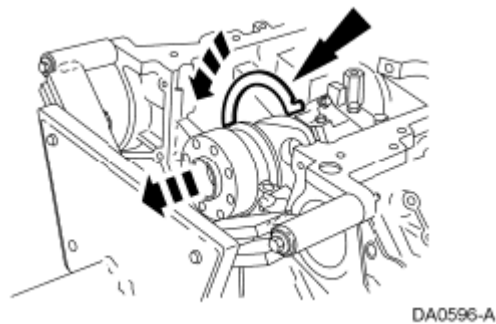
Installing Rear Crankshaft Upper Thrust Washer At Back Of No. 4 Rear Bulkhead
